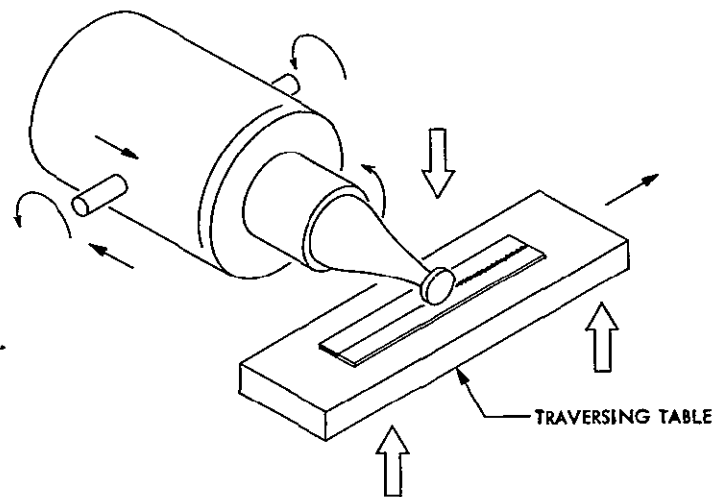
Schematic diagram of traversing-table continuous-seam welding machine (Ref. 23)
